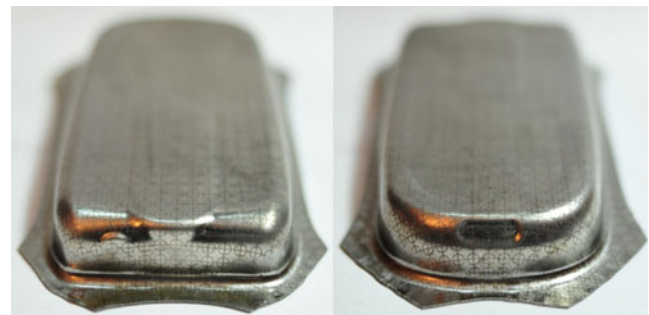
Deformation of SUS 304 without fracture (holding force, 2 t; chamfer width, 20 mm)
